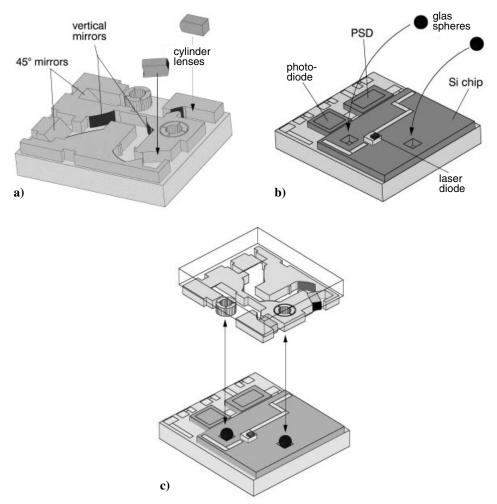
(a) Passive optical chip; (b) electrooptical Si chip; (c) head-over assembly of opto-electro-mechanical distance sensor system [22] (with permission of Springer-Verlag).
